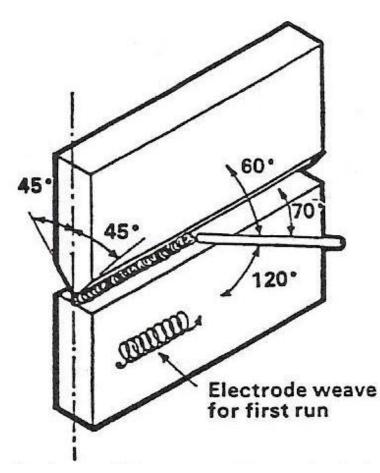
Horizontal Butt Weld in Vertical Plate
